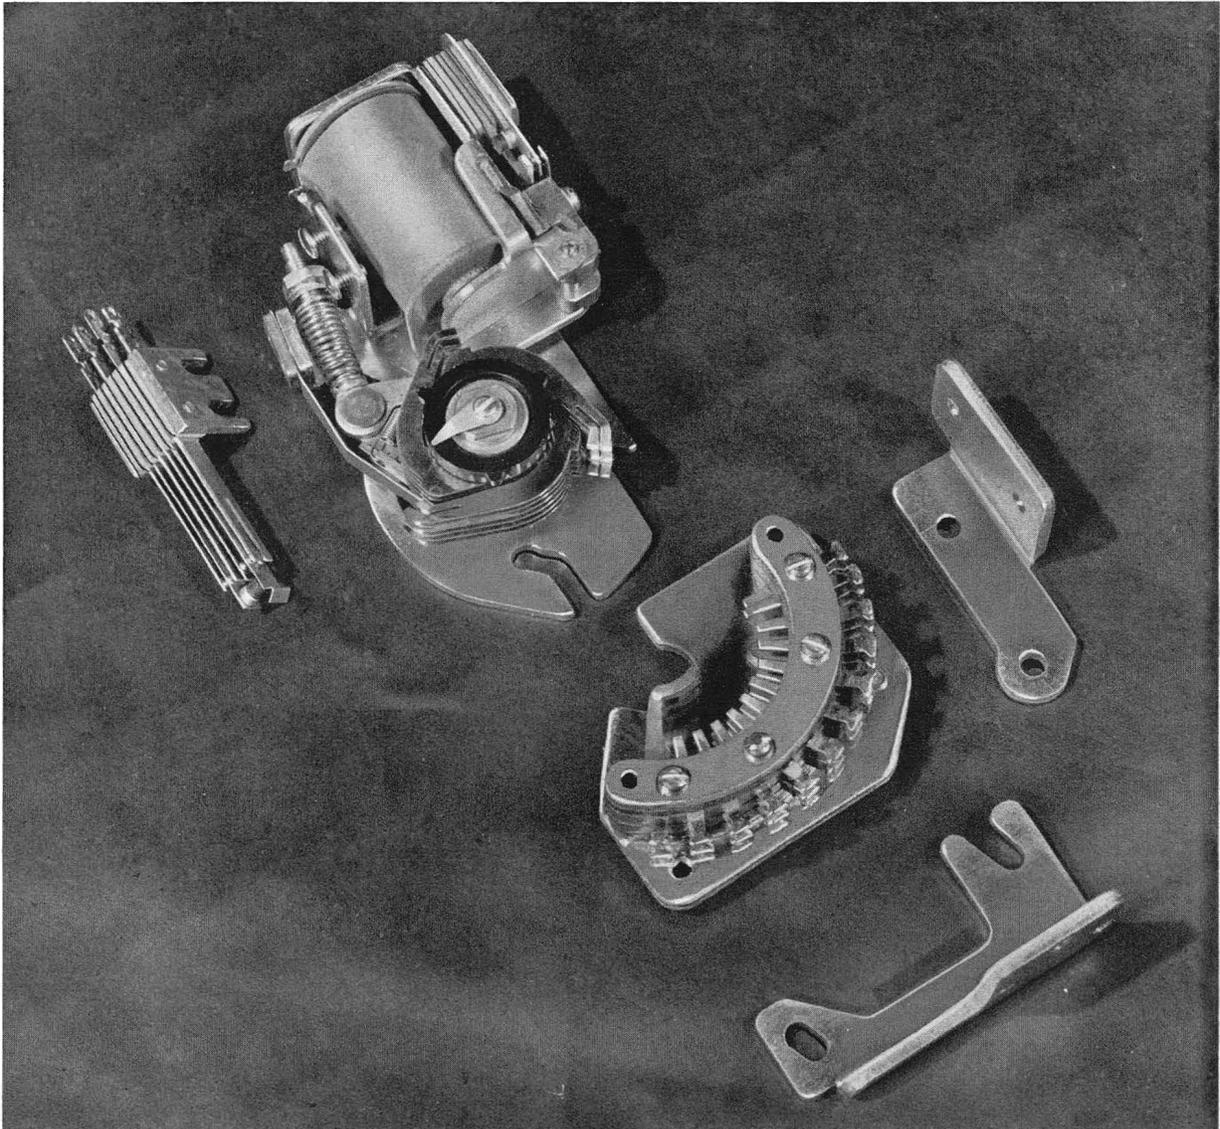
Component parts of the Type 44 Rotary Switch. Adjustment of the driving mechanism is not affected by this disassembly.
